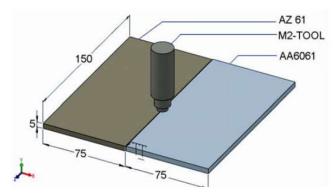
Schematic illustration of Friction Stir Welding of dissimilar alloys AA6061-AZ61
